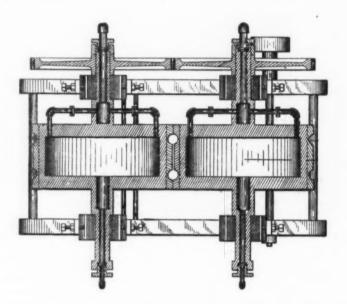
Sectional Plan of Machine for Rolling Sheets.
